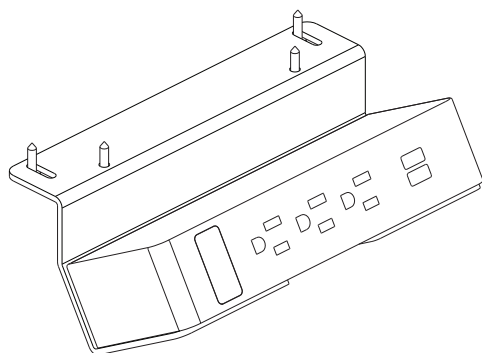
Electrical Component for Tables – Power Center (311 shown)
